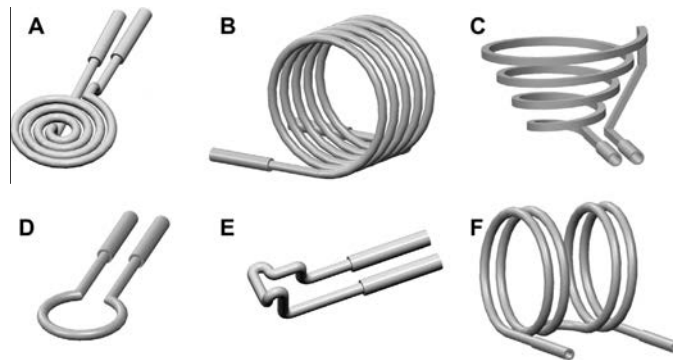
Common coil designs applied for the inductive heating of composites (A) pancake coil, (B) helical coil, (C) conical coil, (D) single-turn coil, (E) irregular coil adapted to the workpiece shape, (F) double-helical coil (Helmholtz coil) [10].
